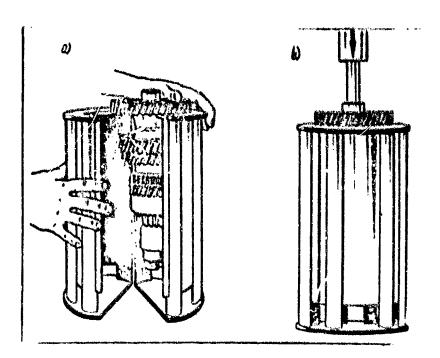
Disassembly of the intermediate shaft: a) installation of the intermediate shaft in a device b) pressing off the constant engagement gear
